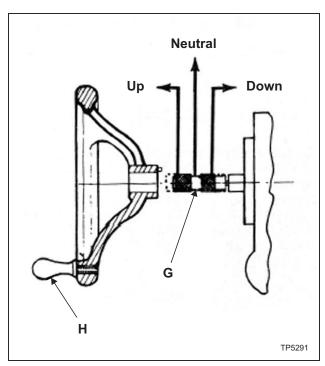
Feed Reverse Knob and Manual Feed Handwheel
